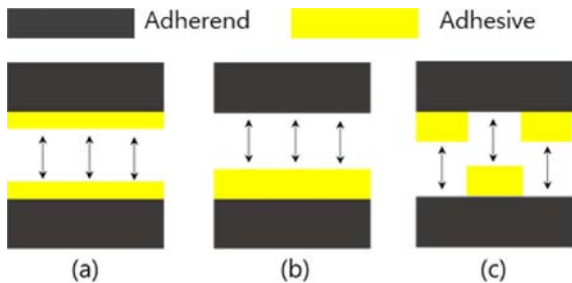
Schematic diagram of the failure modes of an adhesive bonded joints: (a) Cohesive failure, (b) Adhesive failure, (c) Mixed mode failure
